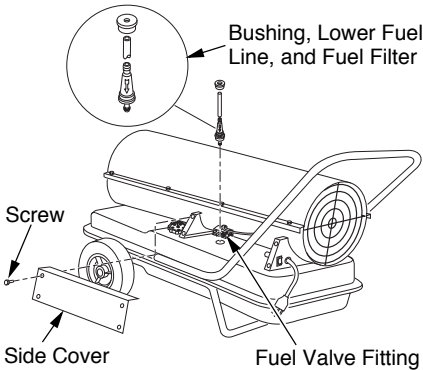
Fuel Filter Removal, 110/115/155/165 Models
